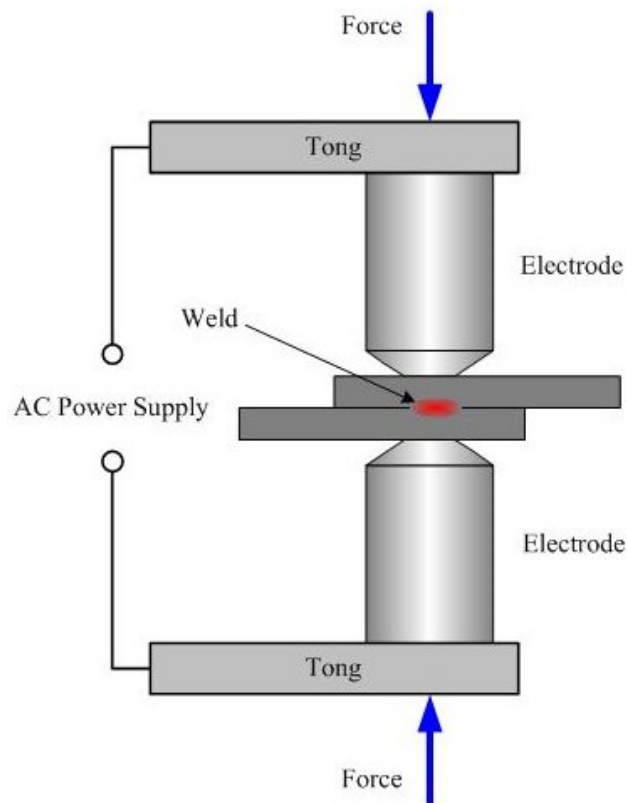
Spot welding technique, as seen from side view [16].
